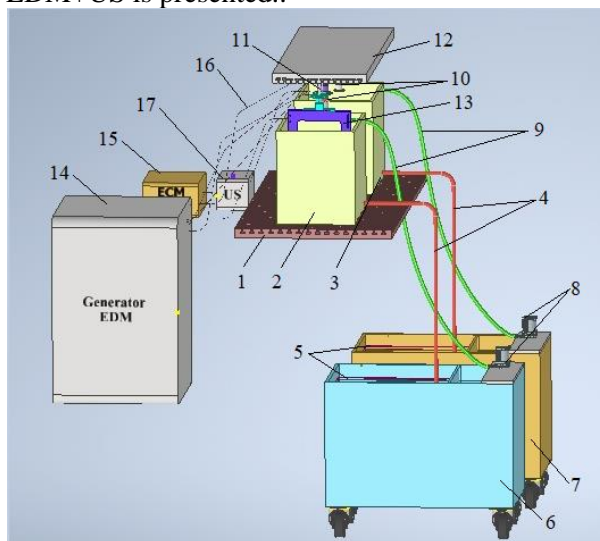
Hybrid technology equipment assembly (W)EDM-ECM+US
